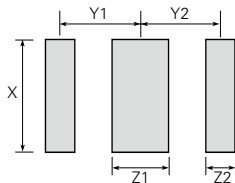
G11 — Dimensions for Gas Discharge Tubes
